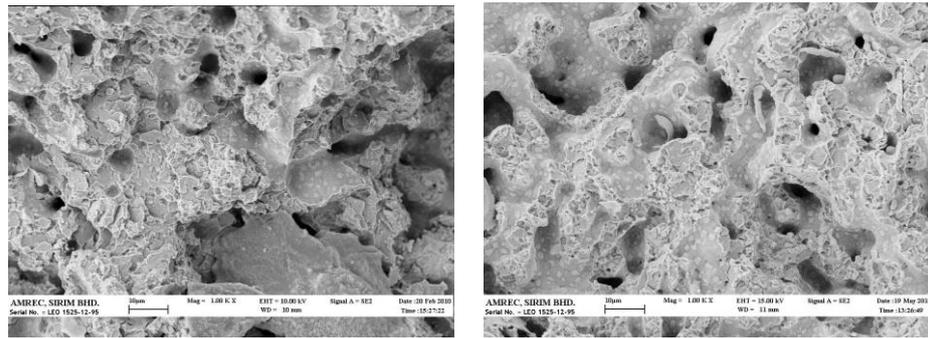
Fracture morphologies of of (a) PW part sintered at 1210°C, (b) PS part sintered at 1210°C
